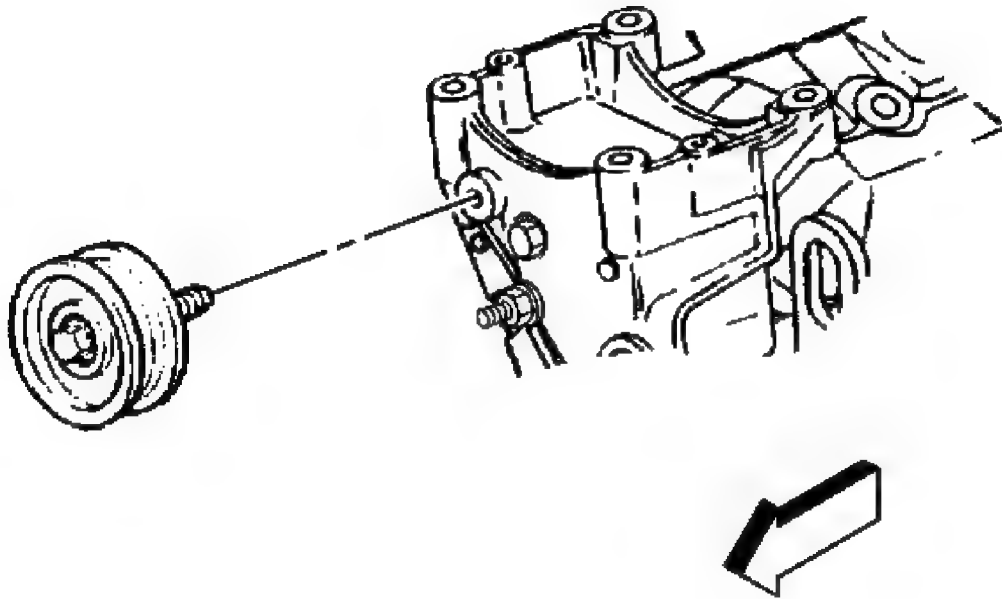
View Of Drive Belt Idler Pulley Assembly
